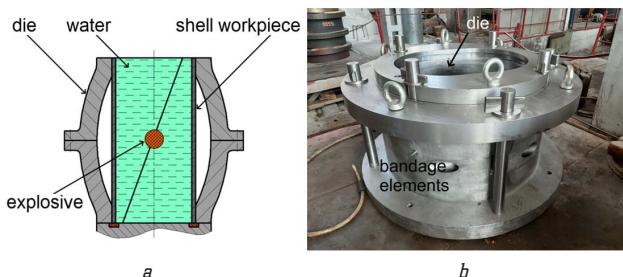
Explosive forming tool: a – a typical scheme of forging a shell workpiece with an axisymmetric arrangement of the explosive charge; b – tooling design
